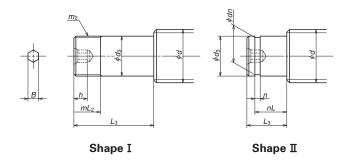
Standard shaft end configuration (opposite to the drive side)
